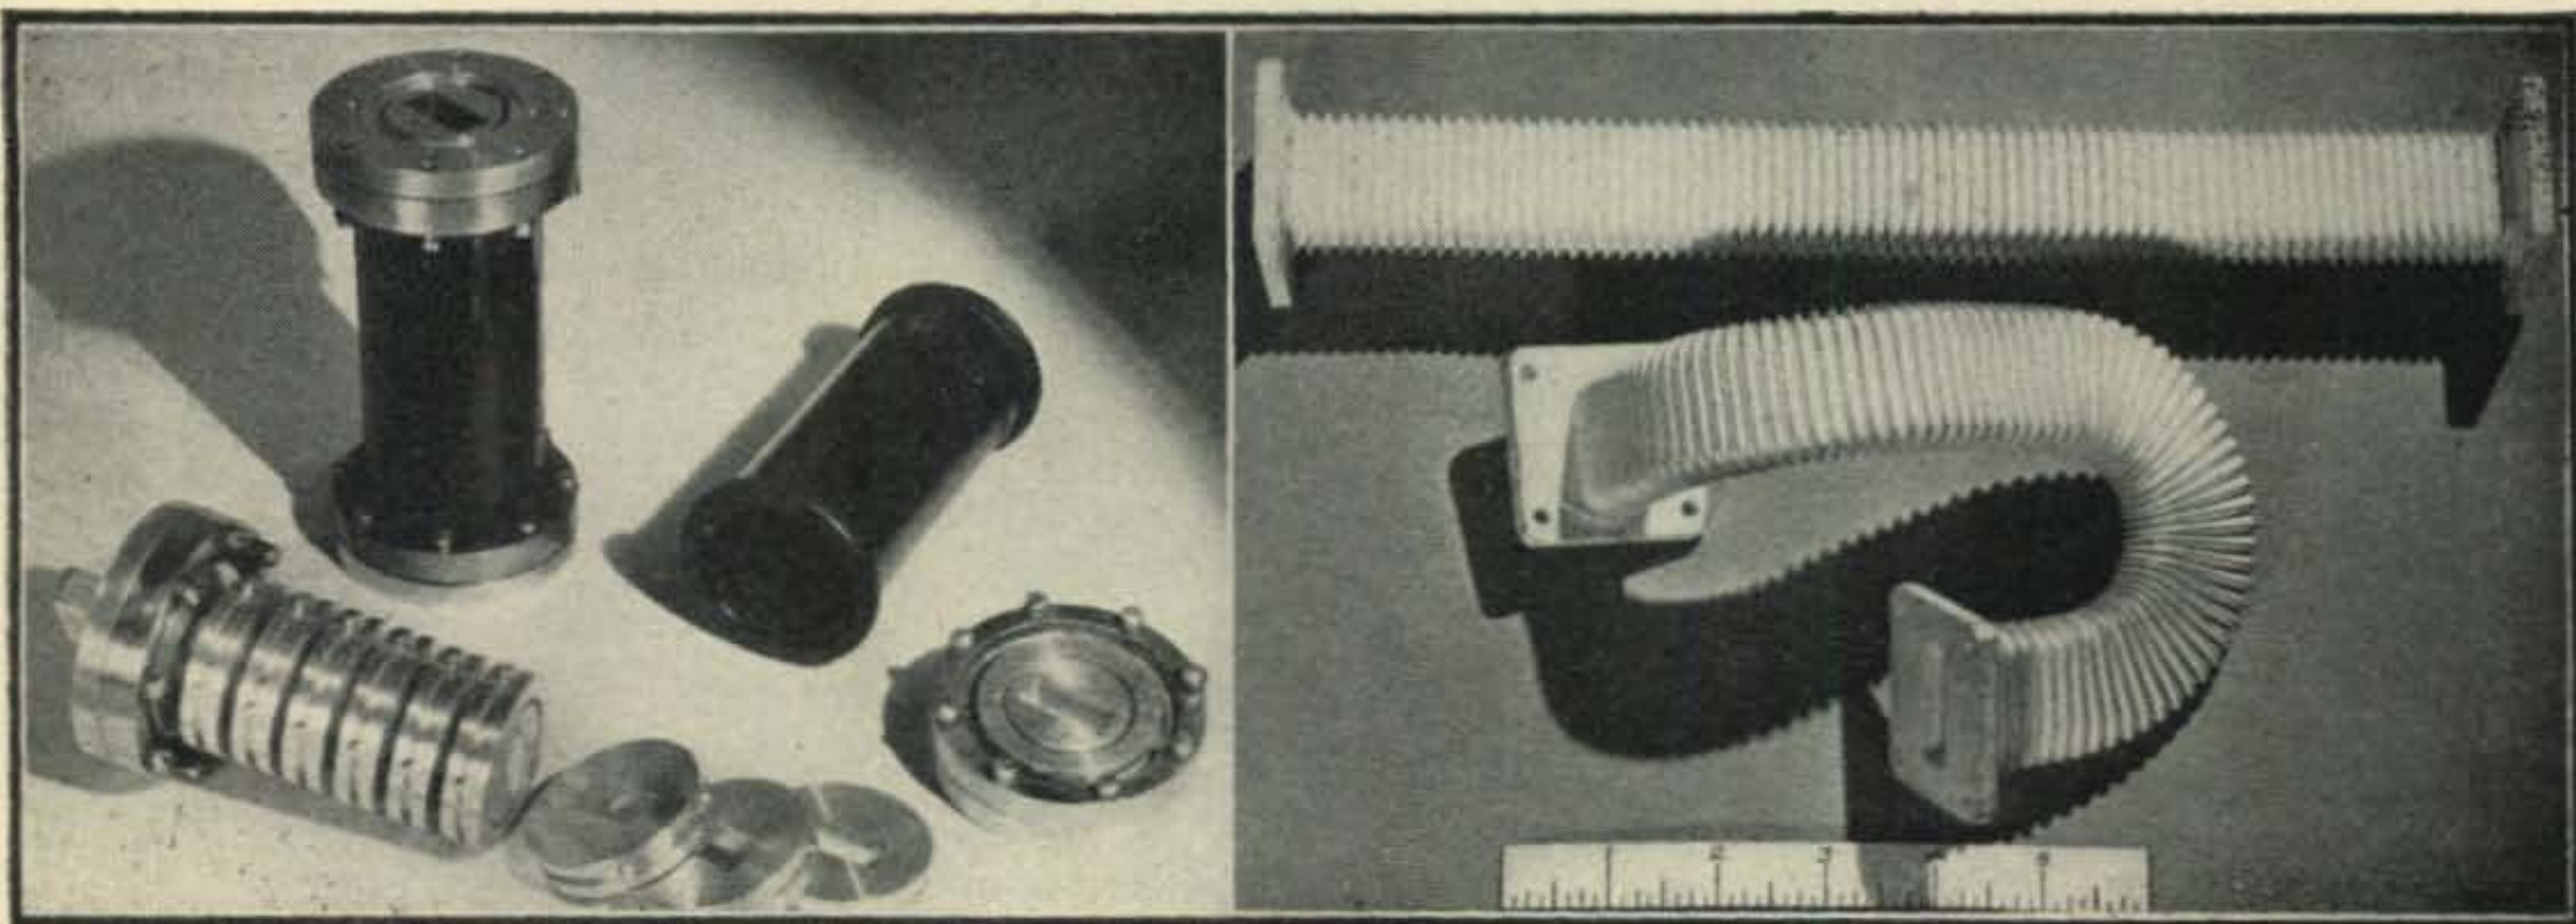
(left) End fittings, choke-plate disks and synthetic rubber jacket used in Vertebra waveguide assembly, together with a completed assembly. Fig. 6. (right) Two silver plated seamless copper waveguides with an I.D. of $.5 \times 1.125$, before and after being bent in both planes. With two plate flanges such assemblies have a nominal V.S.W.R. of 1.08.
